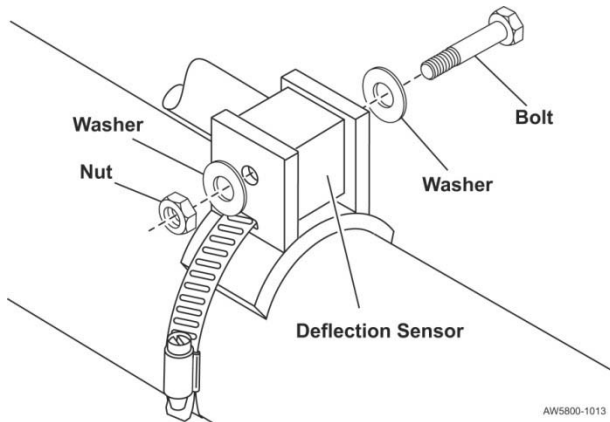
Inserting Bolt and Washers into Sensor and Bracket
